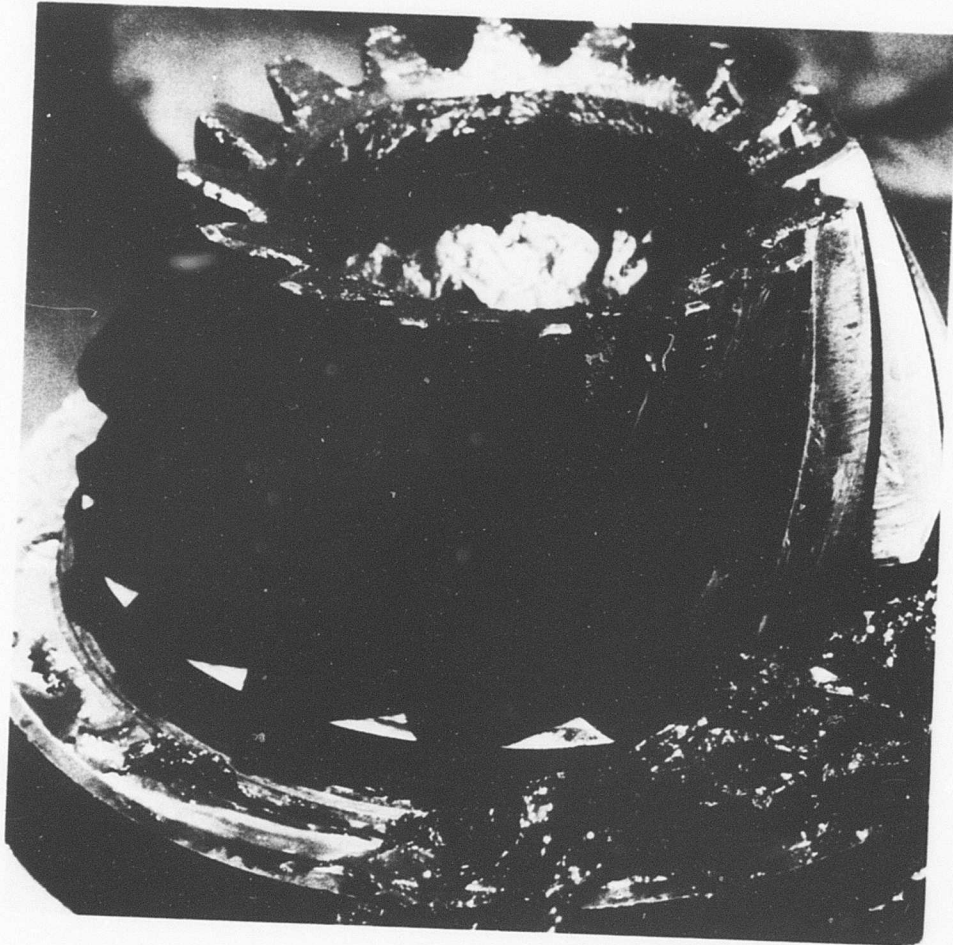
Tail Gearbox Input Gear After 4 Hours
